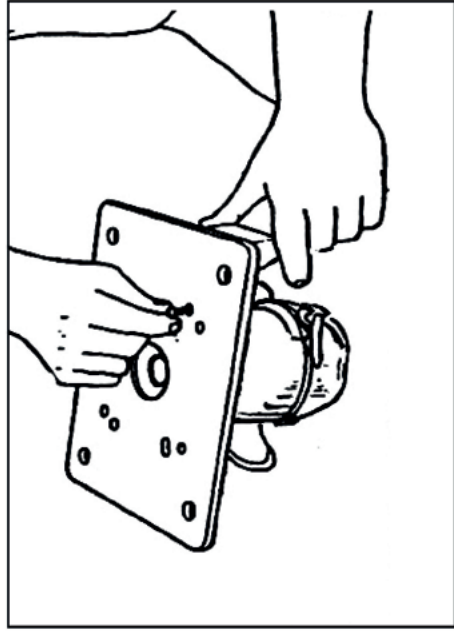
Remove the base plate from the router (Make sure power is disconnected prior to installing router or removing base plate) and align the table plate hole to the router base plate hole.
